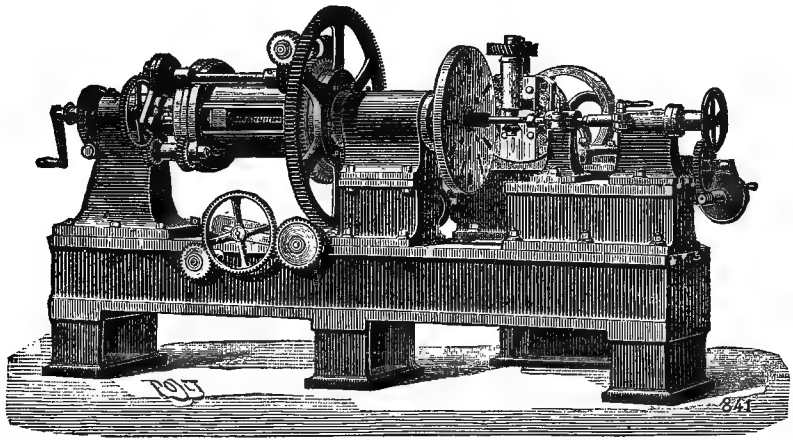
Large gear-cutter; by the Société Alsacienne.
